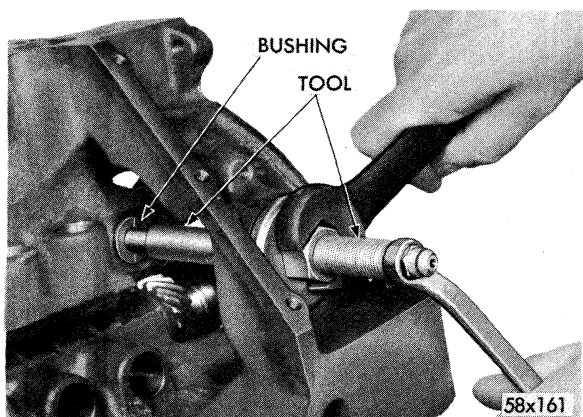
Burnishing Distributor Drive Shaft Bushing
